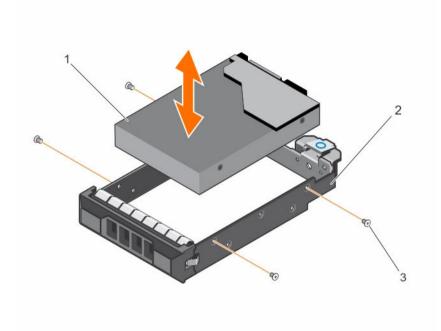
Removing a cabled hard drive from a cabled hard drive carrier
